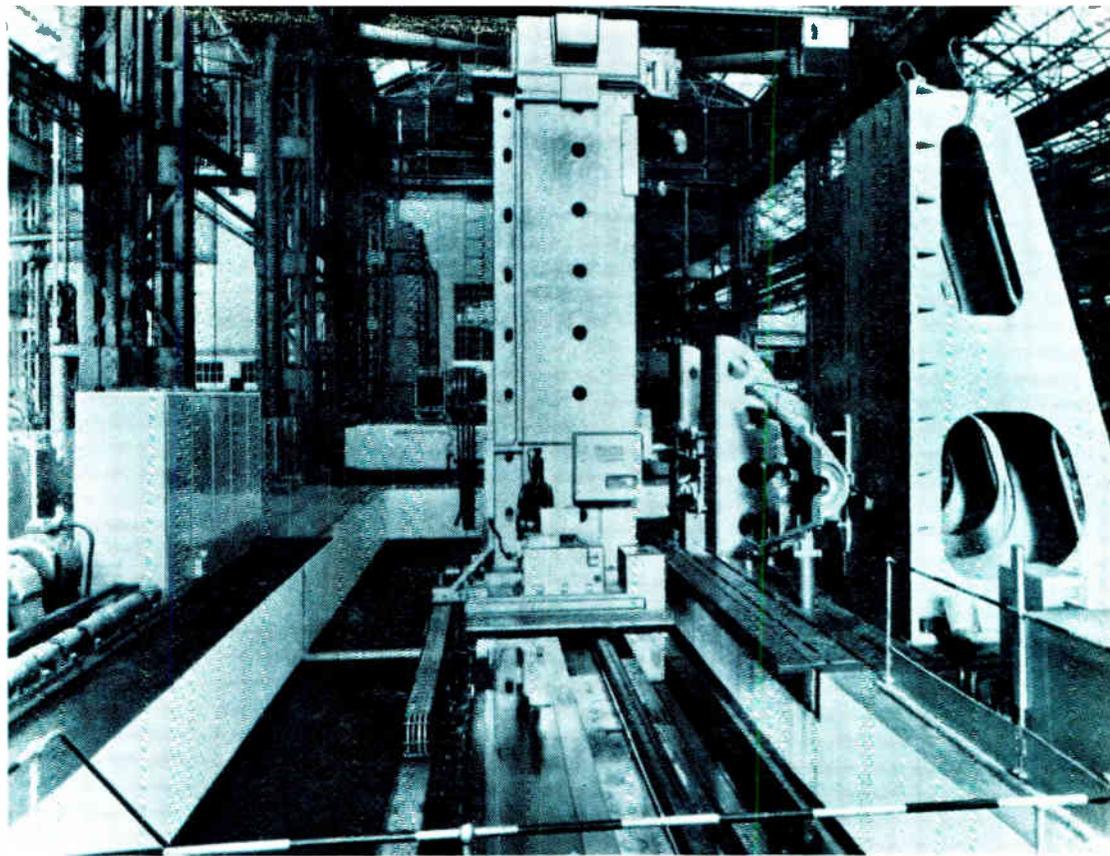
Asquith 6-in. spindle ram type boring machine with variable-speed electric drives for the column, spindle box and spindle
